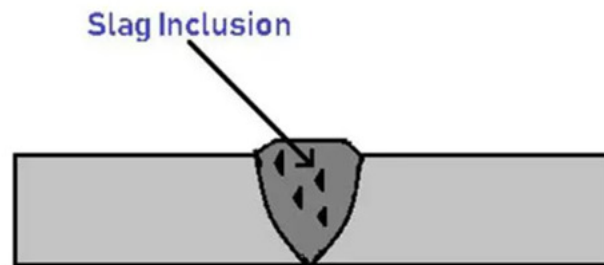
Representing the Slag Inclusion in weld [The Engineers Post].
